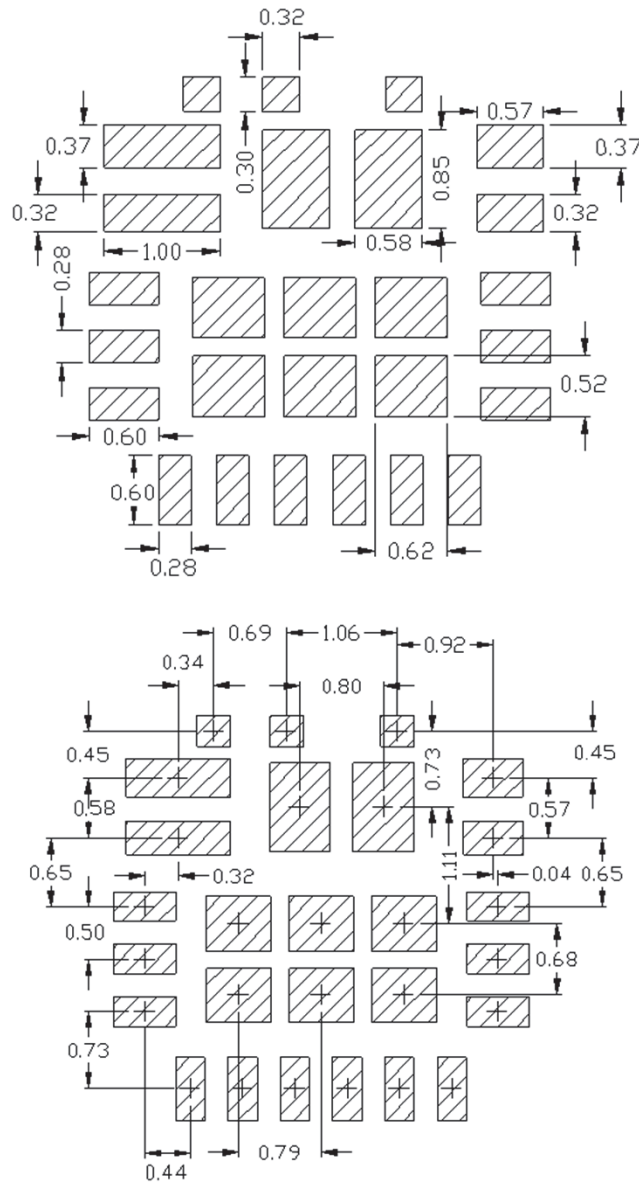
Stencil Pad Spacing (all dimensions in mm)
